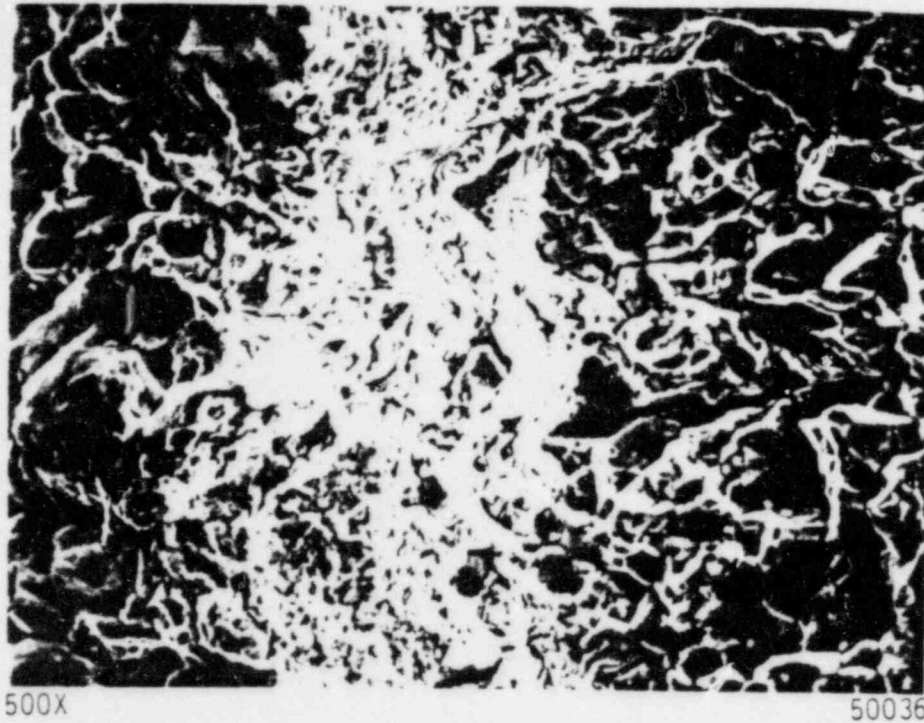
BANDS OF INTERGRANULAR FRACTURE AND DUCTILE FRACTURE (SHEAR STEP) OBSERVED IN REGION 3 ON THE FRACTURE SURFACE SHOWN IN FIGURE 5
